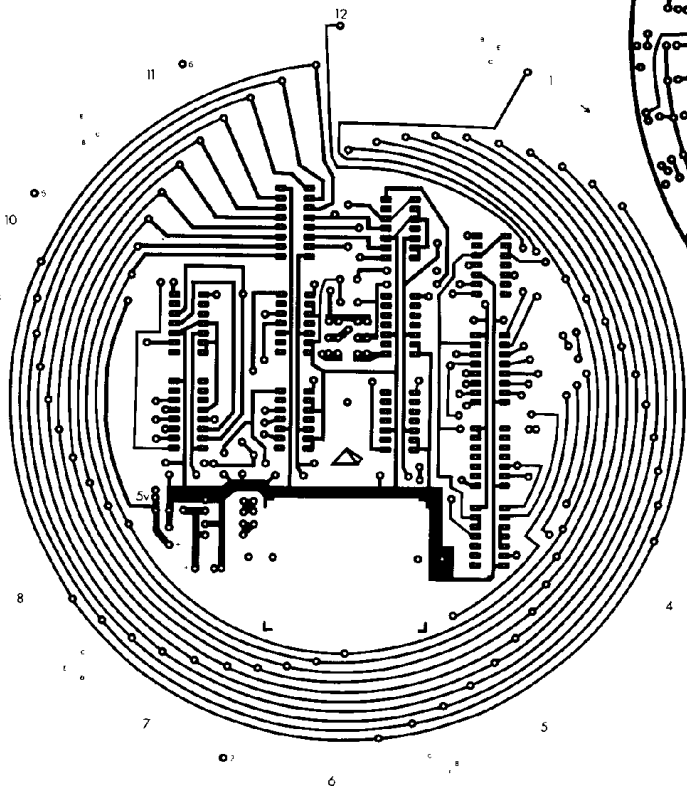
FRONT FOIL PATTERN of double-sided PC board shown half size.
